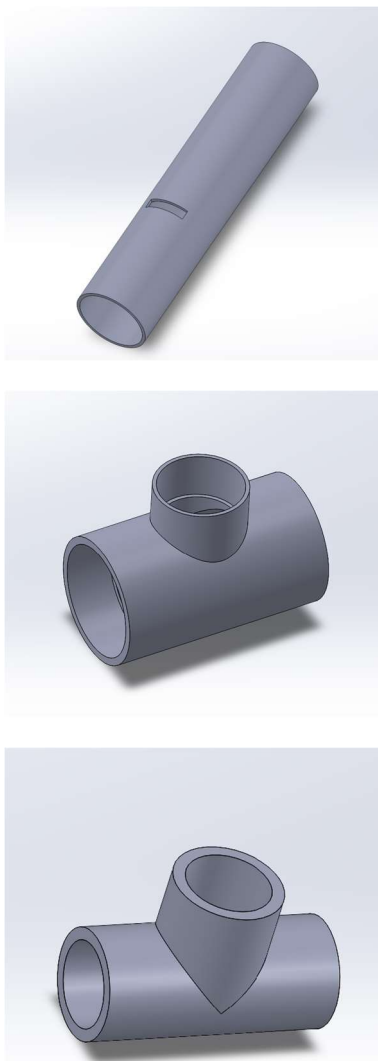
SolidWorks drawings of the parts we previously 3D printed.
